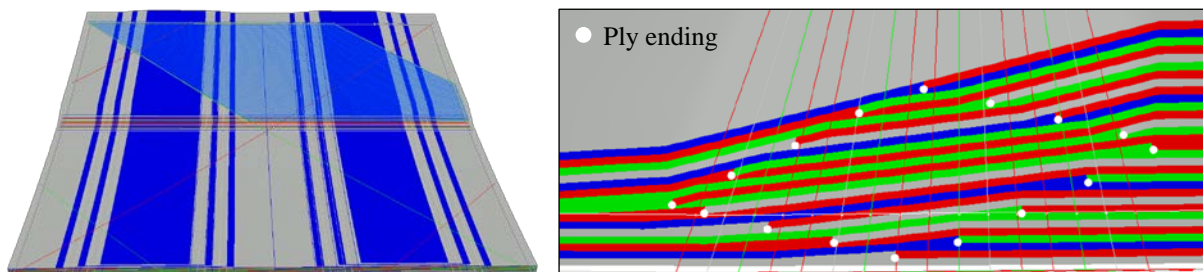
Left: Draping simulation of a 45° cut-piece of a fuselage skin part preform (A350 curvature radius) out of CF/PES UD tape. Tooling surface (green) reconstructed out of laser measurement. Right: Diamond shaped ply endings from thicker to thinner laminate region.
